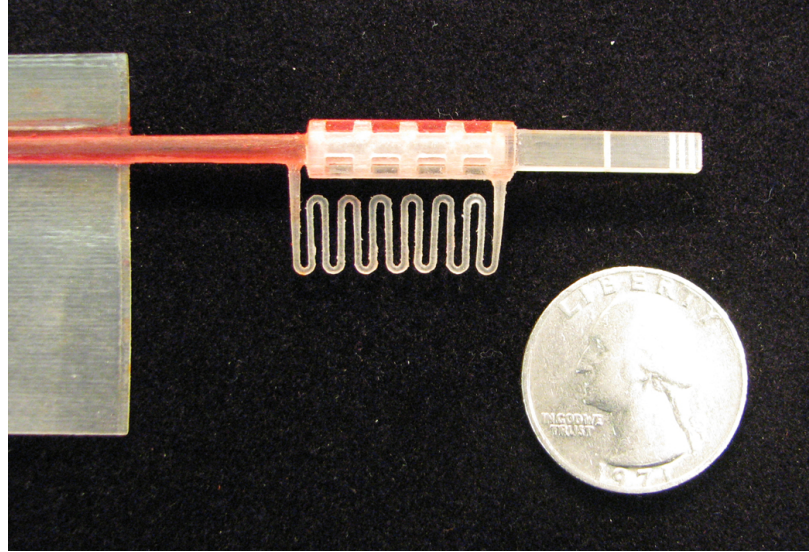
Wing root and hinge showing pinholes for flapping fulcrum and attachment of connecting rod for driving the wing.
